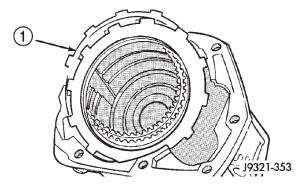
Overdrive Clutch Pack Removal 1 – OVERDRIVE CLUTCH PACK
